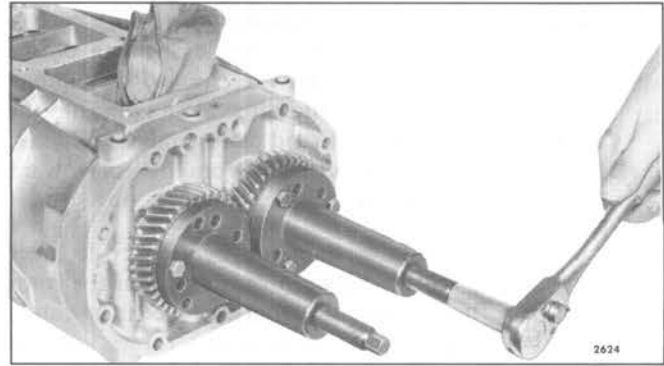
Removing Blower Gears with Tool J 6270-31
